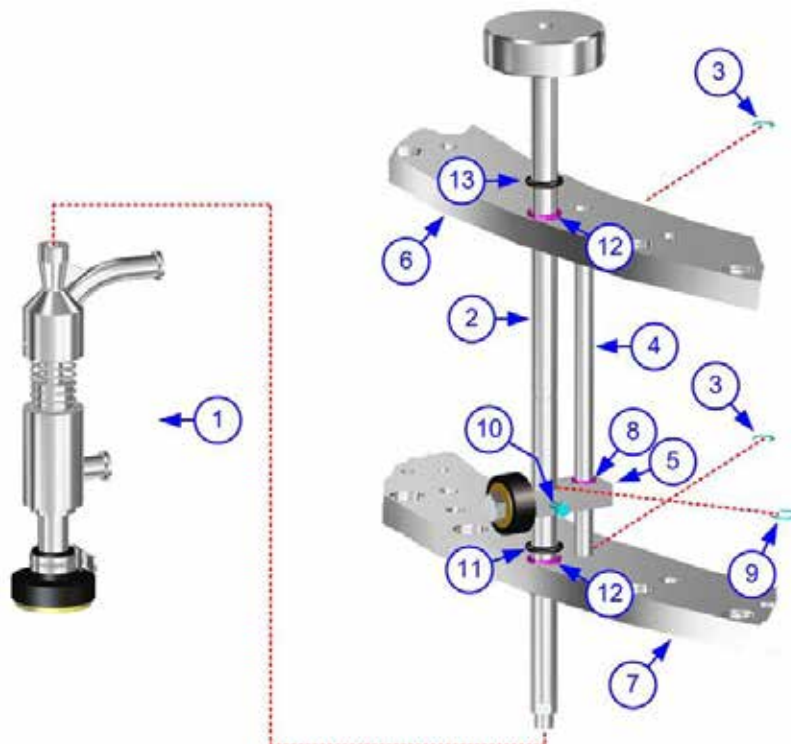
Filler Slide Rod, Pillar, & Bushing Replacement
